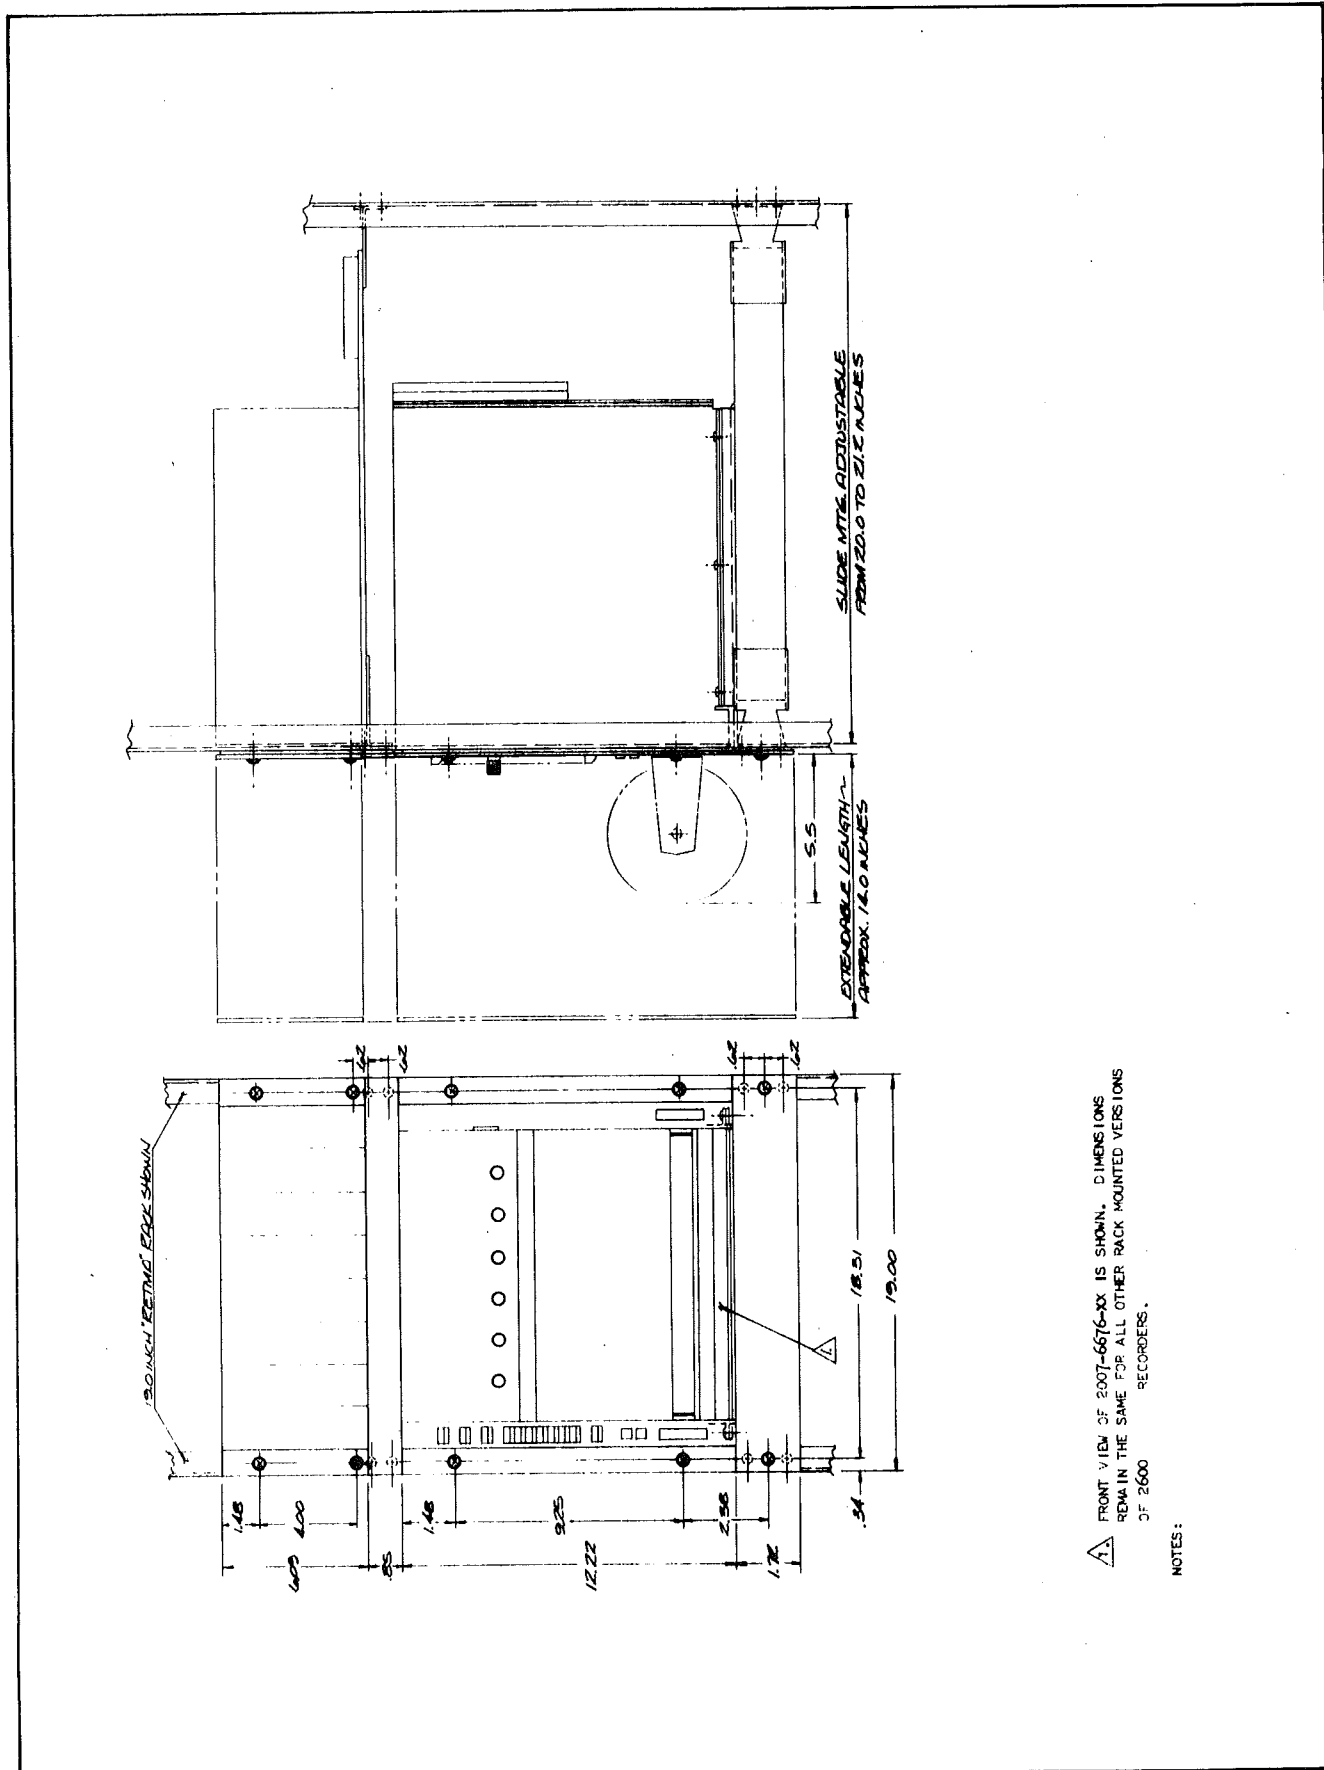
OUTLINE DIMENSIONS 2600 RACK MOUNT
